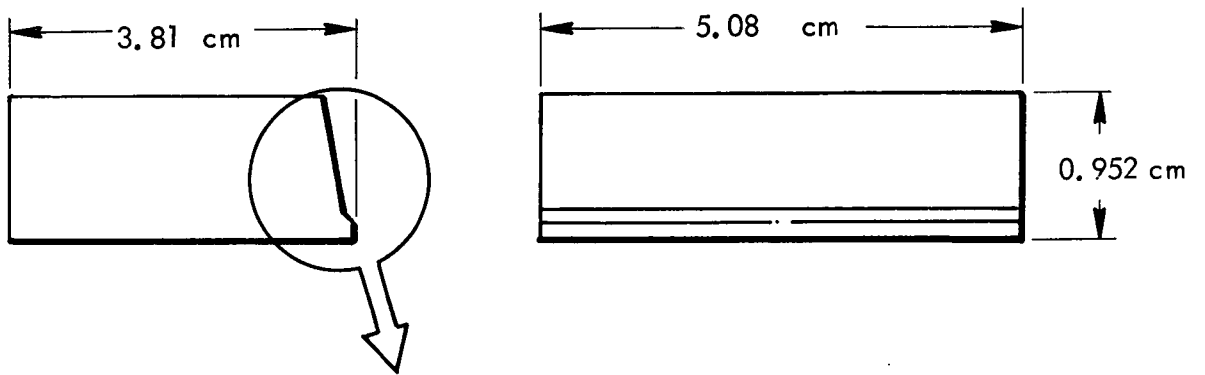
Configuration Used for (Modified) Single "U" Plate Welds
